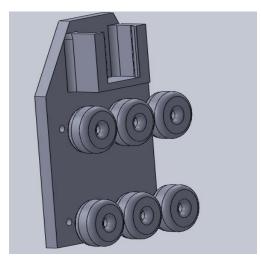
A 3D printed component fitted with bearings replacing the threaded rod
